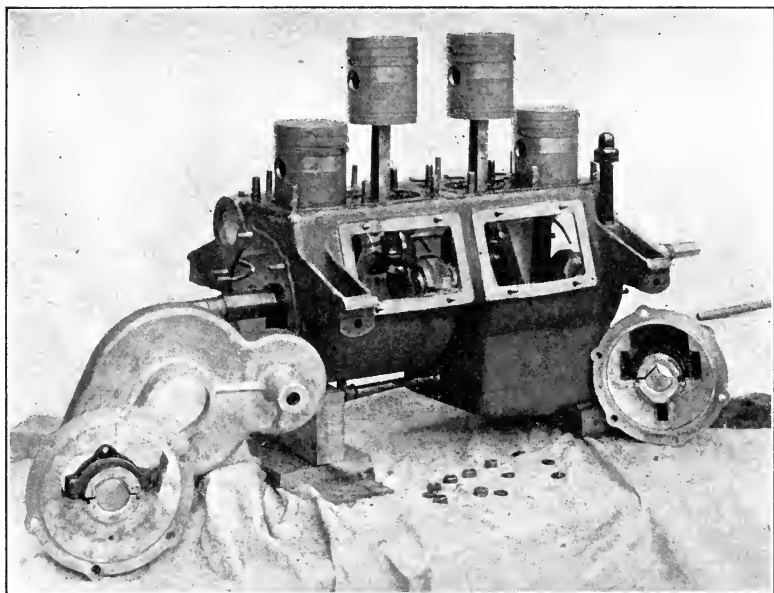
Crank Case of Reo Four-Cylinder Motor, a Barrel Type with Ends Closed by Plates which Support Crank Shaft.
